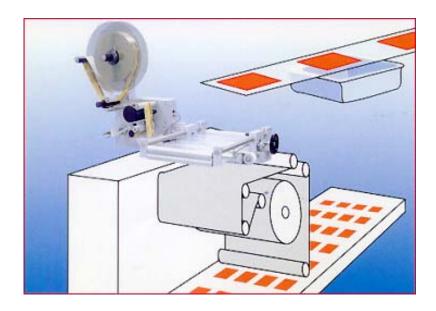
An automatic valve applicator can be fitted to a sealing machine.
